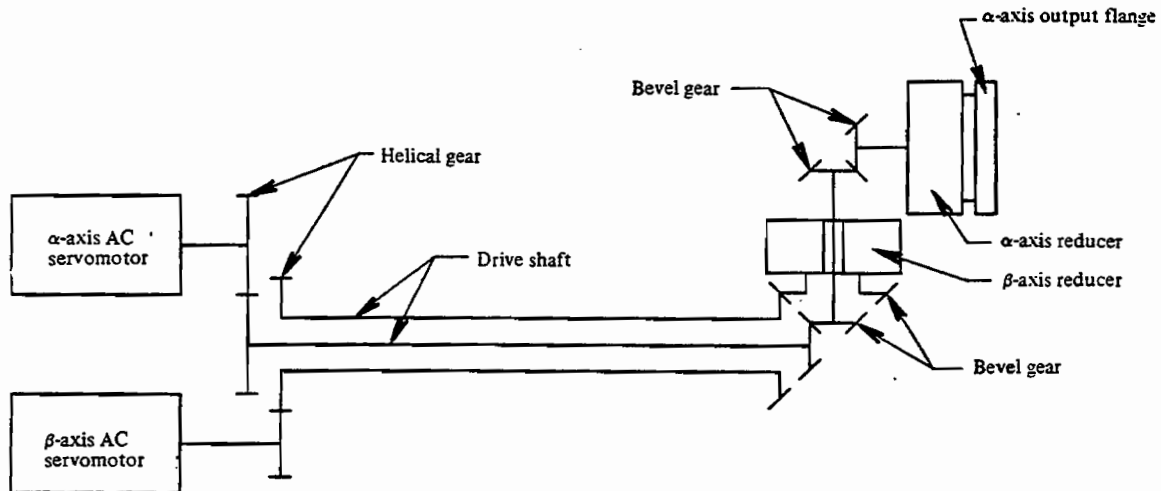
α/β -axis drive mechanism (S-700, offset wrist)
